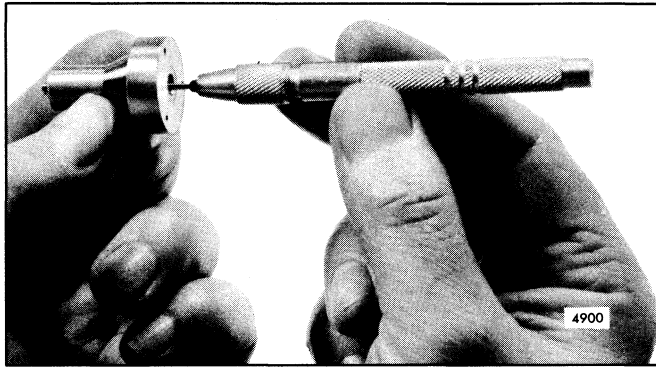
Cleaning Injector Spray Tip with Tool J 22800-01
